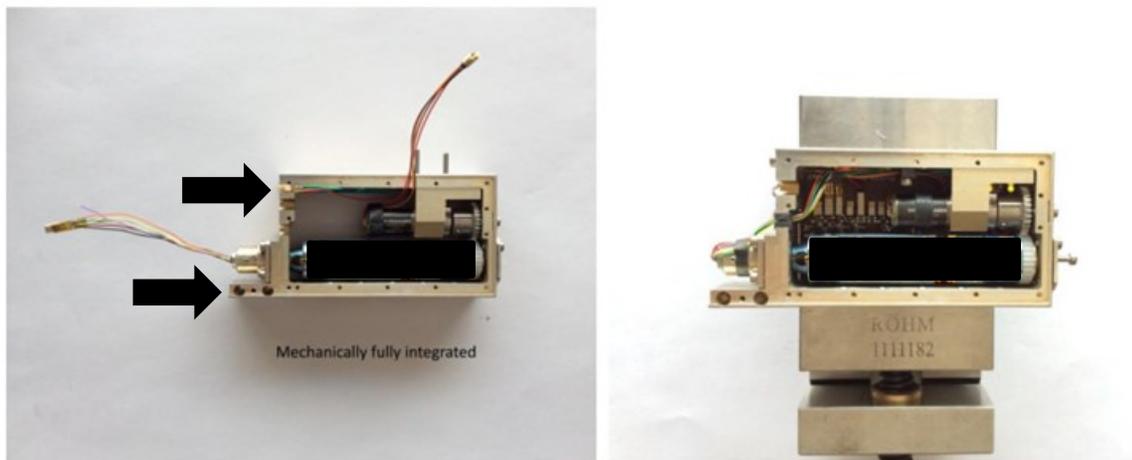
Manufactured and assembled EQM GRASS instrument showing the main characteristics of the payload mechanism. Black arrows indicate the interface for two-axes assembly.
